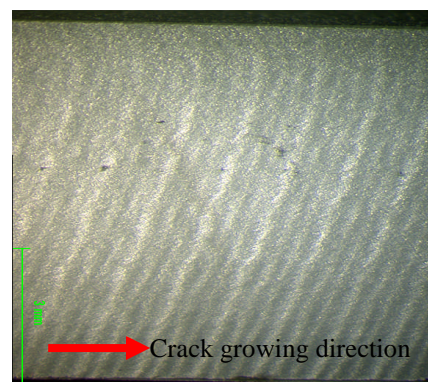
Fracture surface of 185 mm x 50 mm ESET sample
